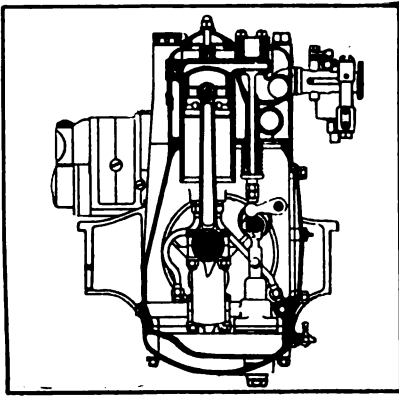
Sectional View of Dorman Marine Engine with Entirely Enclosed and Lubricated Valves.
